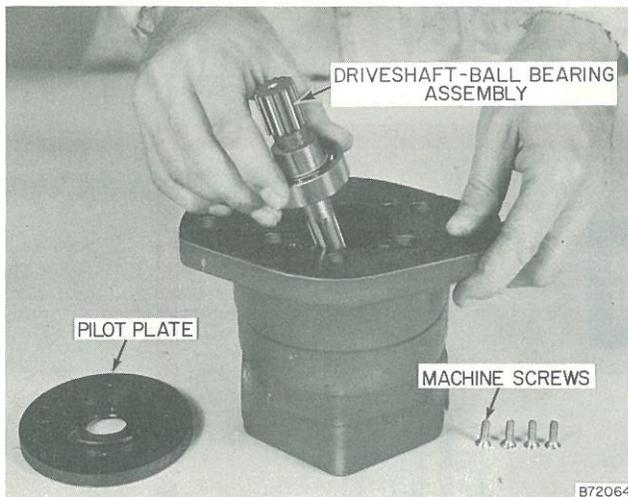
Installing Driveshaft - Ball Bearing Assembly
